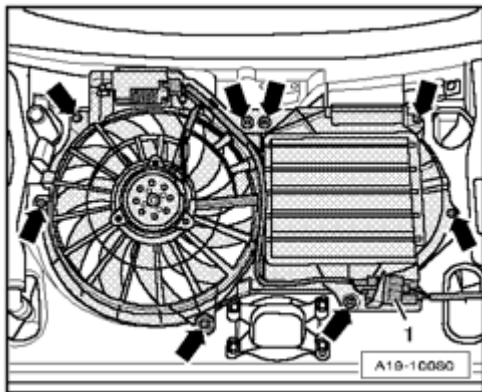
Removing Bolts And Fan Shroud Upward/Out
